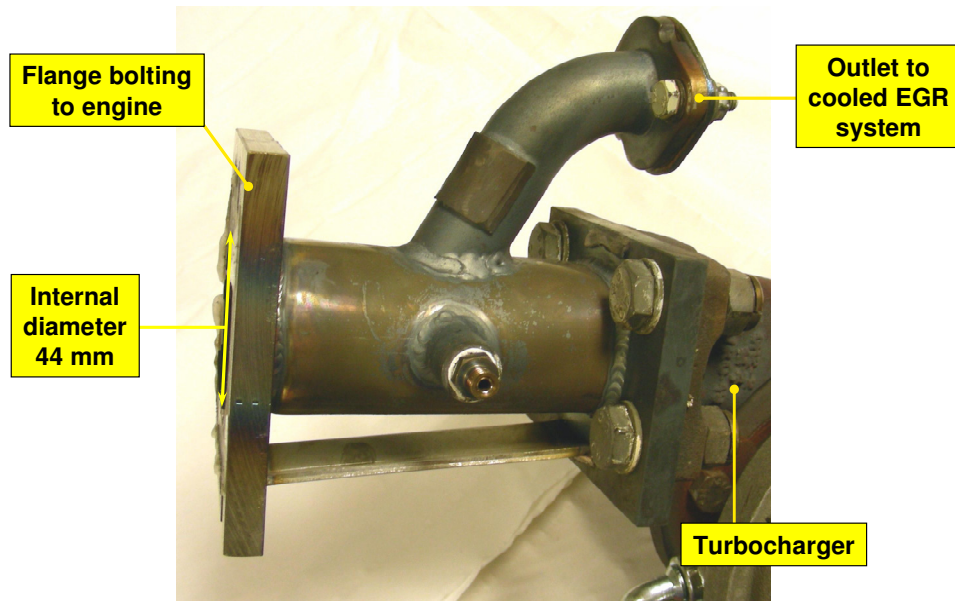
Photograph of position of exhaust gas take-off on turbocharger stub pipe. (Photograph courtesy Lotus Engineering)
